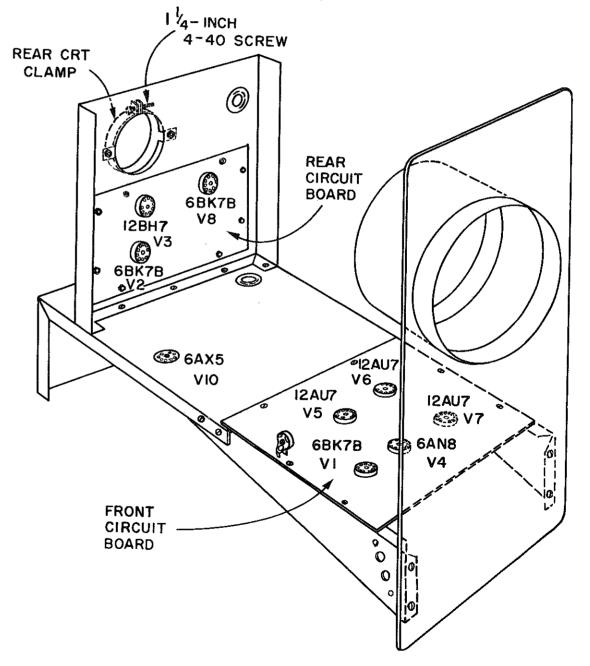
Circuit boards and rear crt clamp added to scope assembly.
